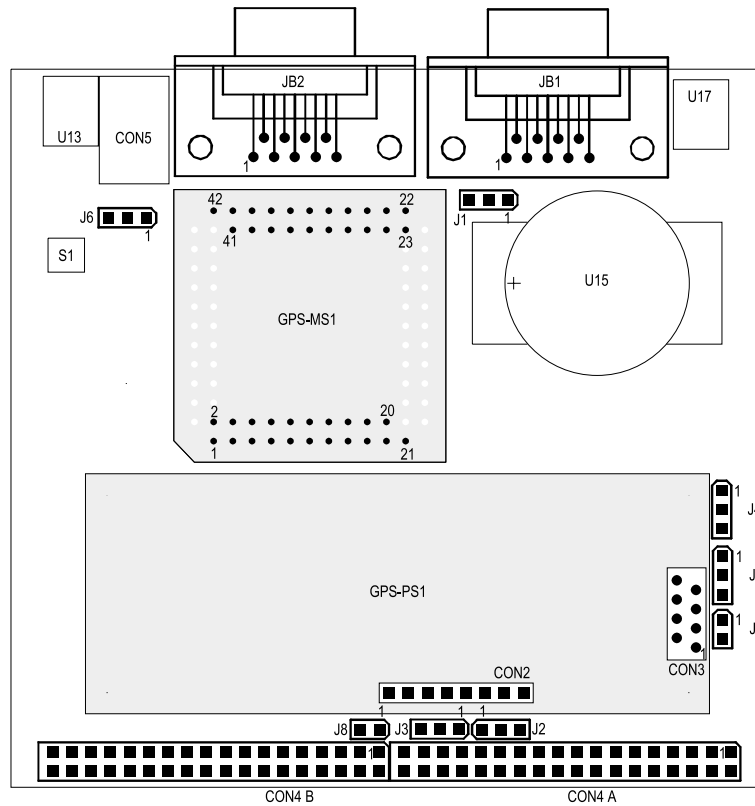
GPS-E1 Jumper Locations, Baseboard Version 1/98
